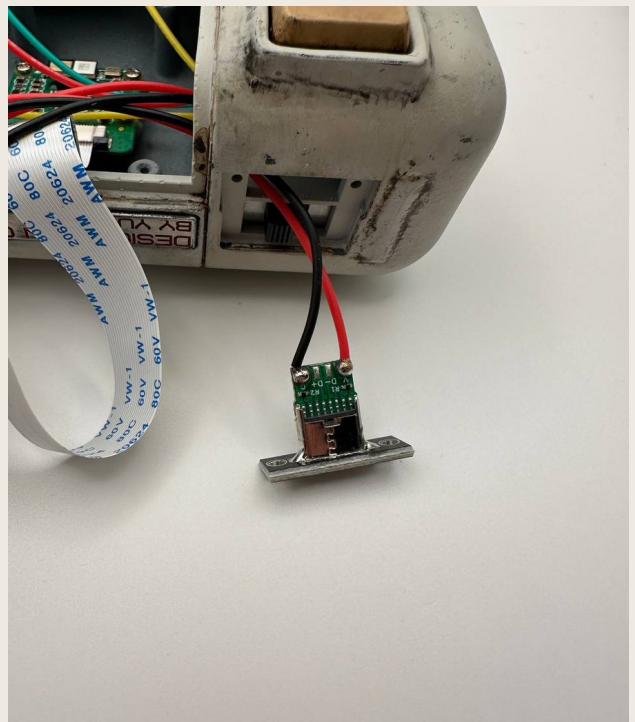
USB-C panel socket wired (5V / GND only); these leads meet the micro-USB pigtail from FIG. 06-5. Fit into the port cutout next to the power switch.
